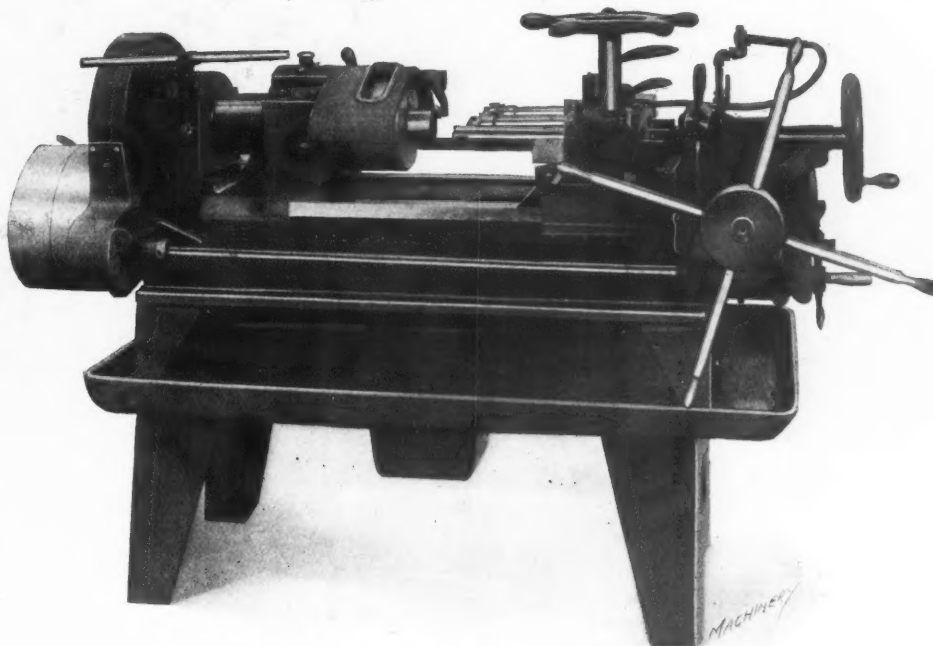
Type B Shell Lathe as equipped for inside boring and reaming
